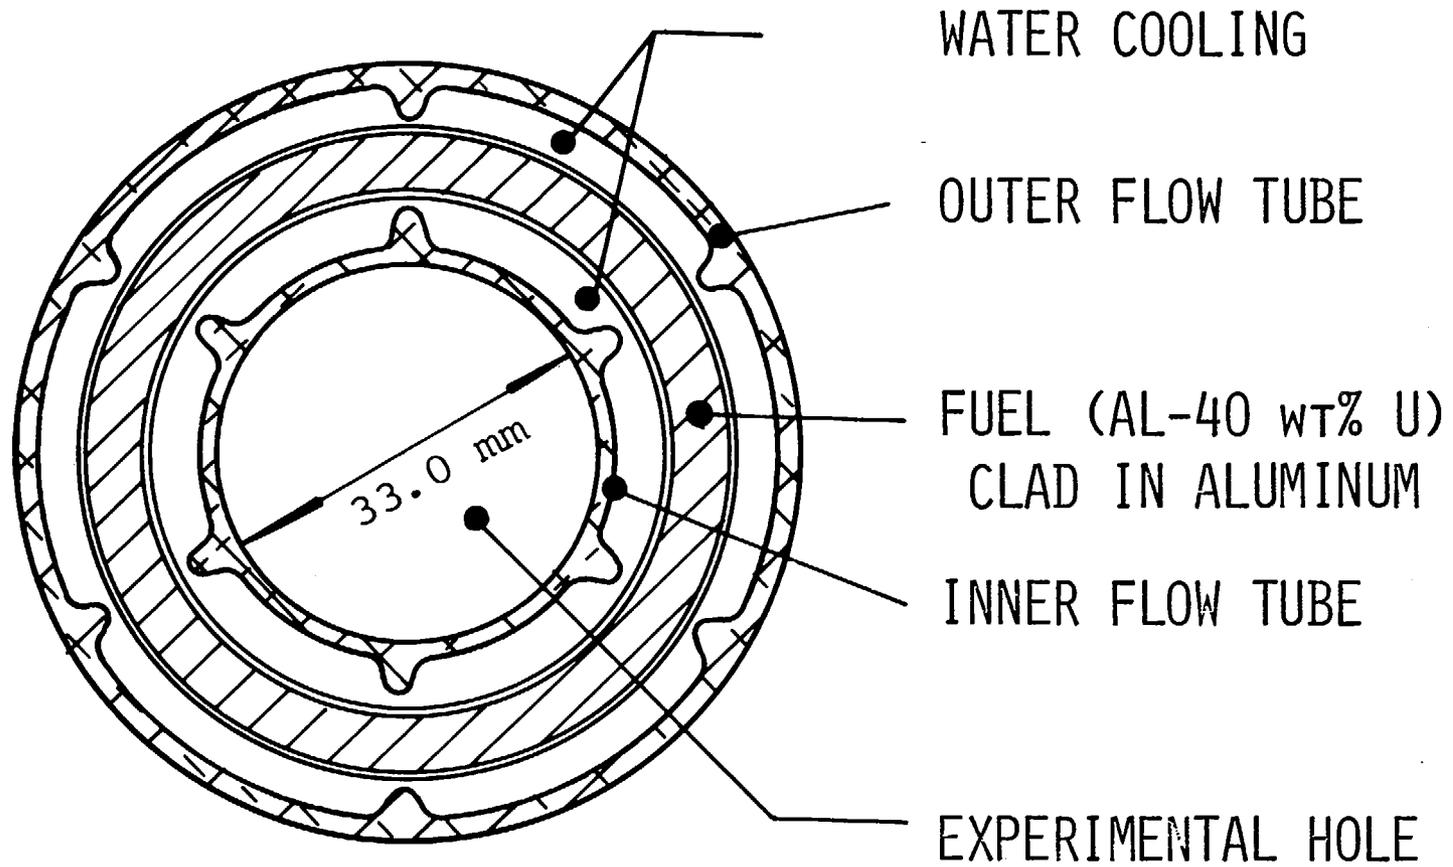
Mark 6 Fast Neutron Assembly (NRX)
